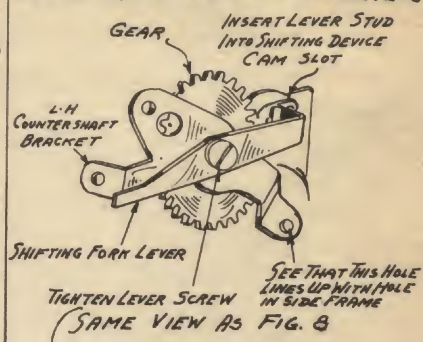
PLACE L.H. COUNTER SHAFT BRACKET AS SHOWN (LOOSELY ON STUD)
